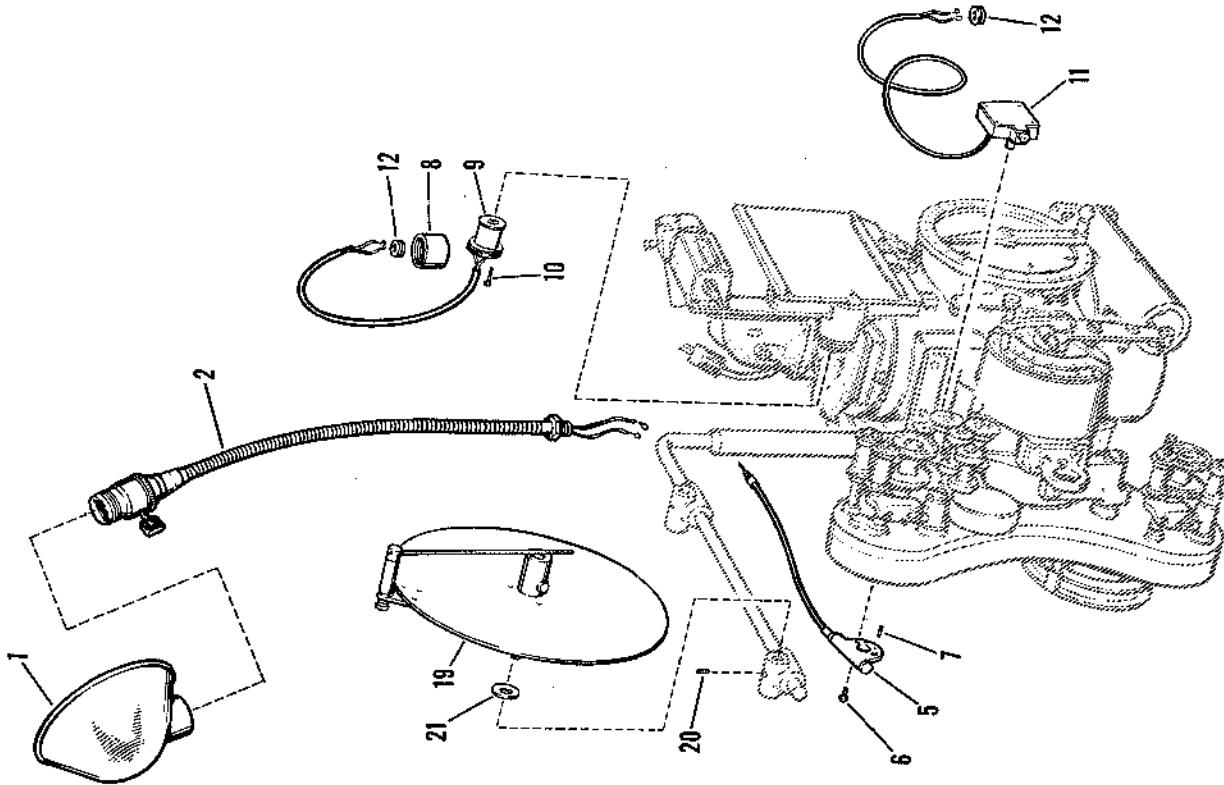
Printer Assembly, Complete - Sheet 1 of 3 Sheets
